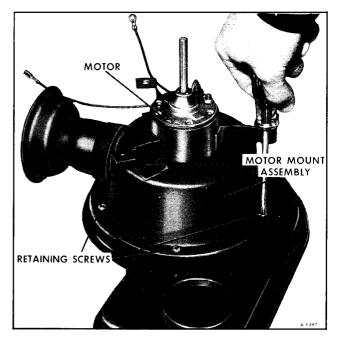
Removing Motor and Mount Assembly Retaining Screws
